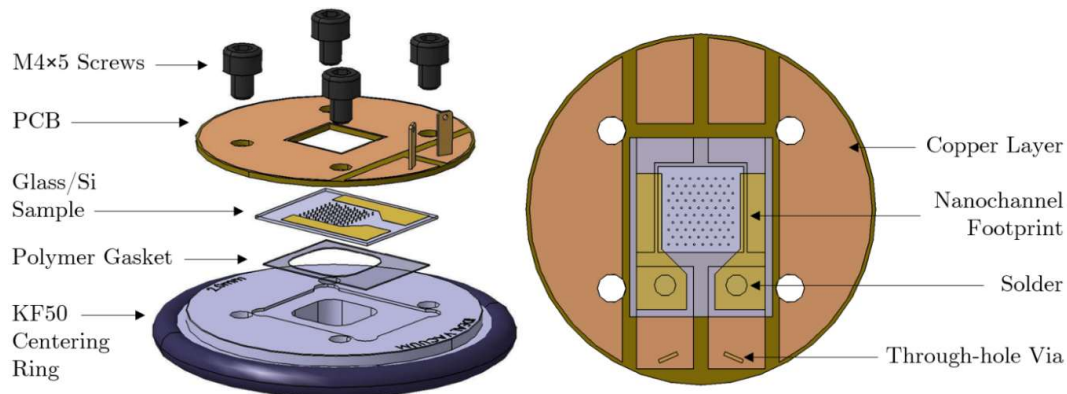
Device assembly for experimental testing. (Left) Exploded isometric view of the test fixture, showing the M4x5 screws, the custom PCB, the Glass/Si nanochannel sample, the polymer sealing gasket, and the machined ISO KF50 centering ring. (Right) Bottom view of the PCB layout, illustrating the copper traces, the central aperture for the nanochannel footprint, the raised solder spots for electrical contact, and the through-hole vias that route the connection.
